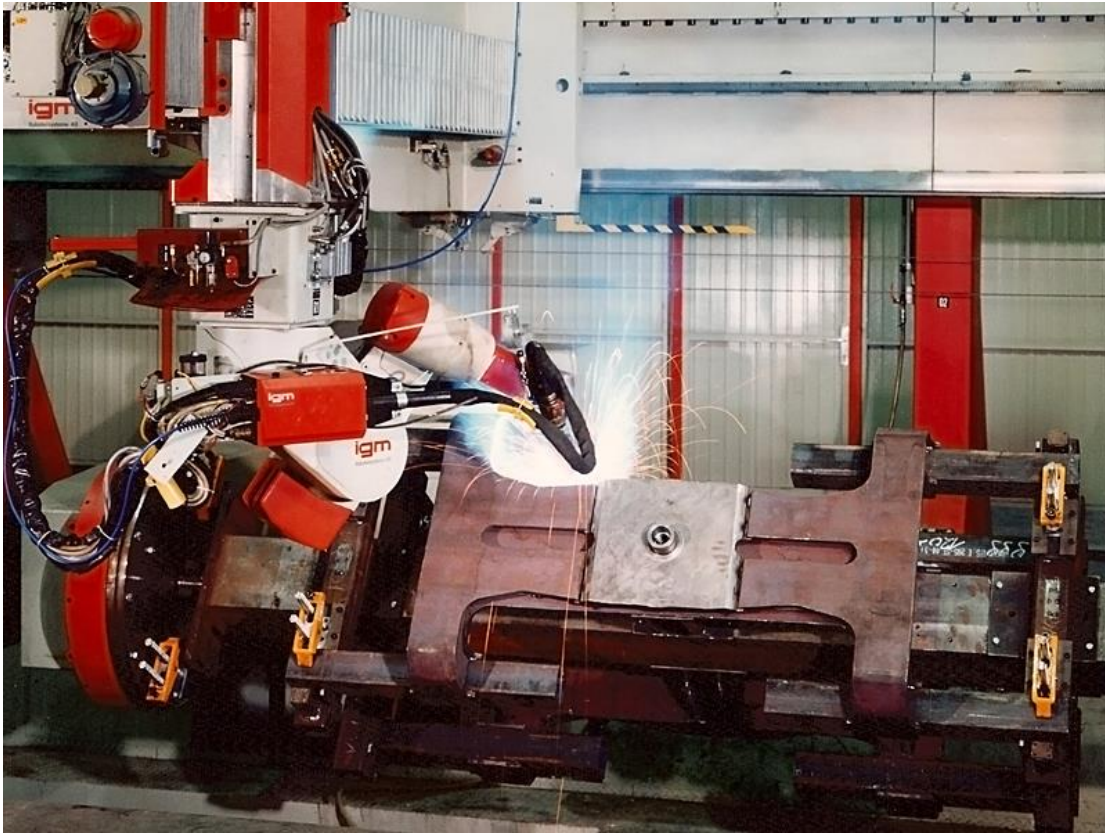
igm gantry robot welding a bogie cross frame [igm, 2013]
